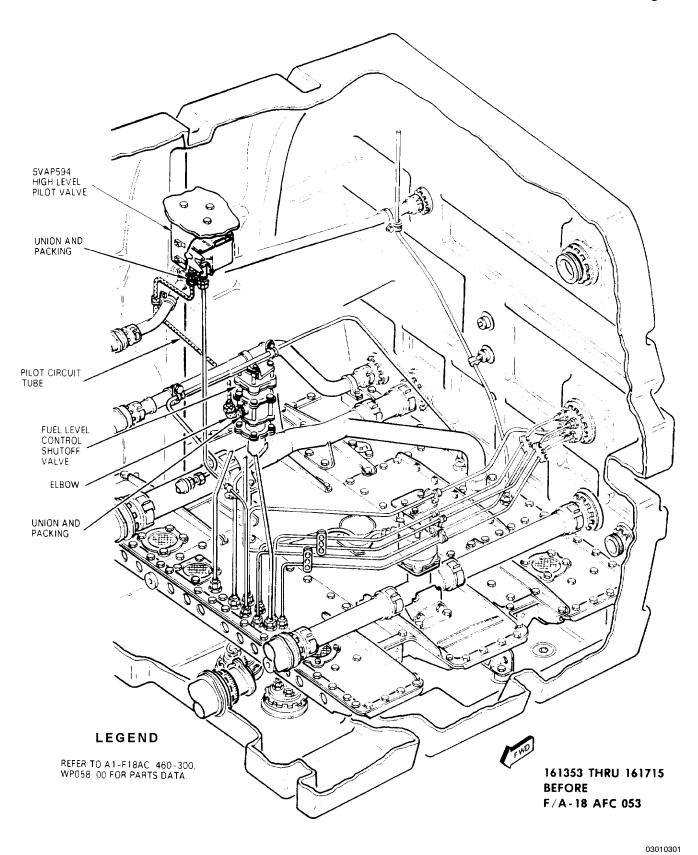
No. 2 Fuel Tank Troubleshooting Component Locator (Sheet 1 of 2)
